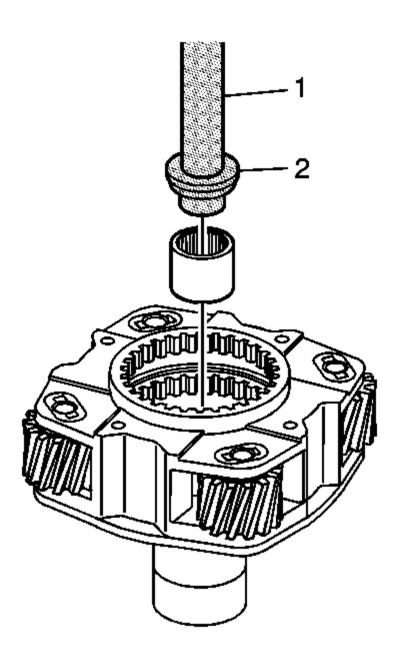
Identifying J 42176 & J 45757 Courtesy of GENERAL MOTORS CORP.
